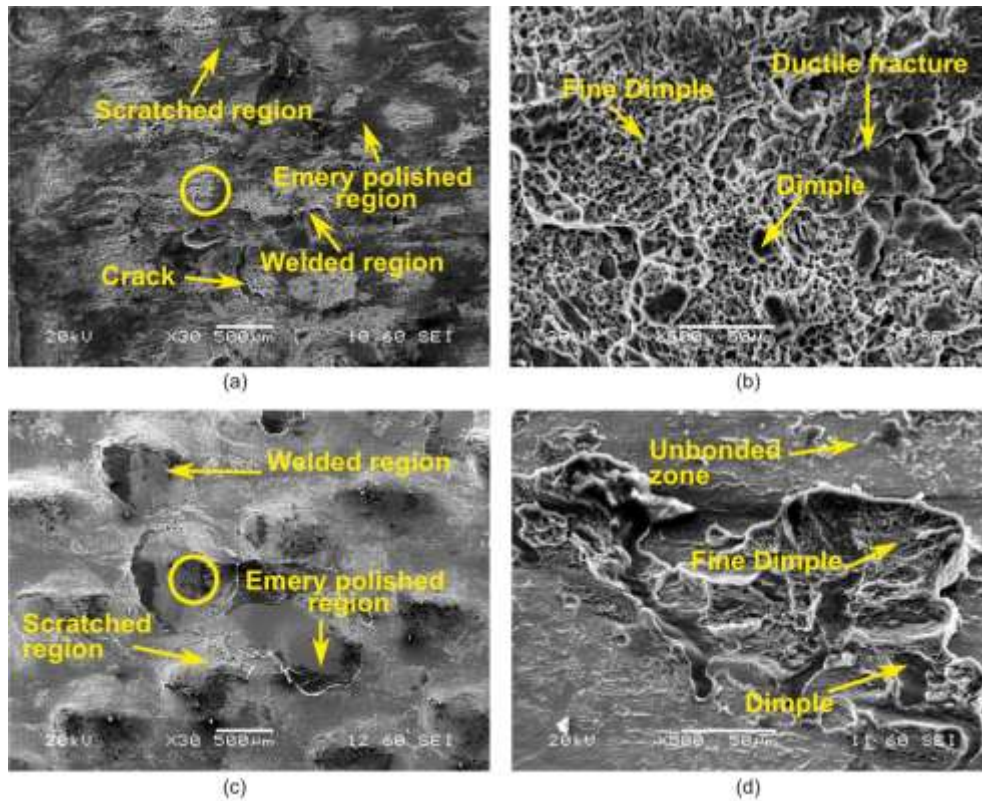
Fractured surfaces of ultrasonic welded specimens in emery surface condition (a) Al side surface with 30X zoom; (b) Magnified image of a; (c) SS side surface with 30X zoom; (d) Magnified image of c
